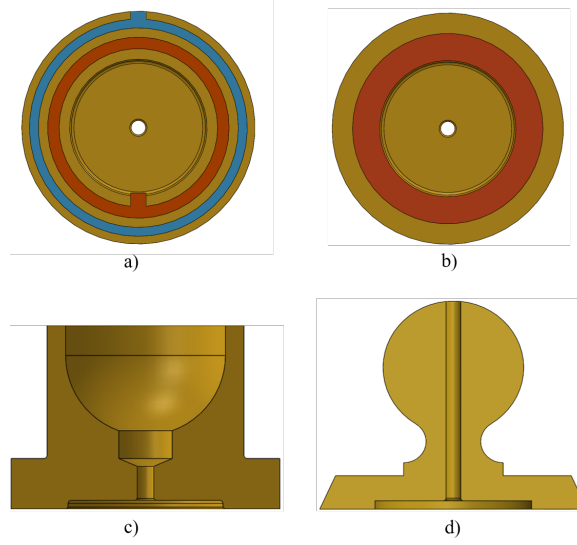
Different slipper designs; a) multi-land slipper design b) single land with a step c) female design d) male design
